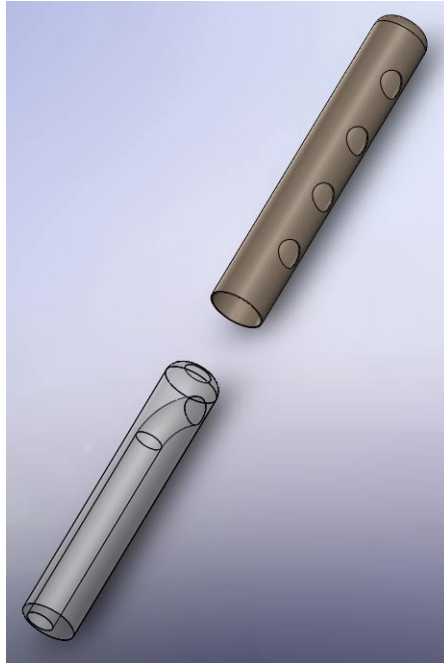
The guided catheter design with the internal component incorporating the track and the external component with the holes for the injection component to exit.
